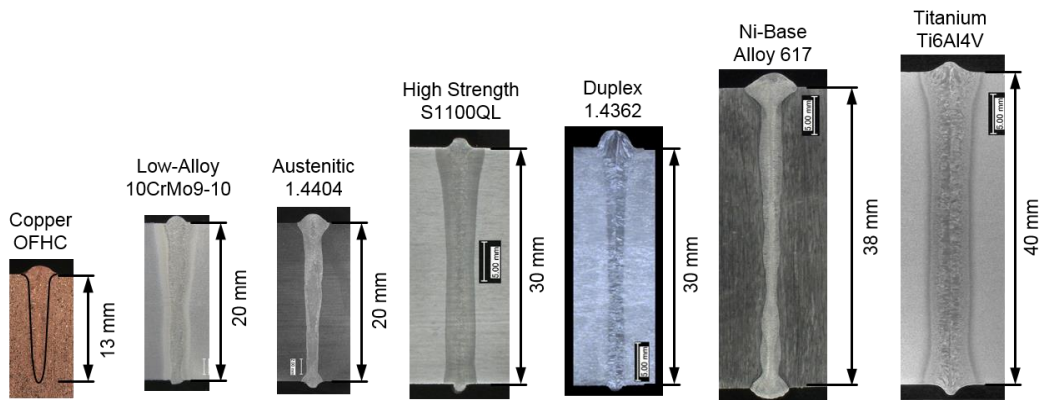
Samples of welding trials beyond unalloyed mild steels
